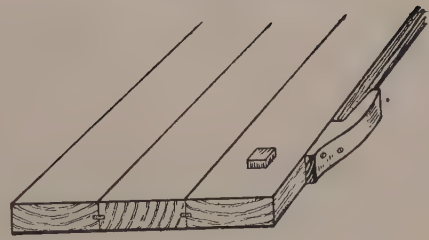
METHOD OF JOINTING TOP AND MAKING WEDGE VICE.
